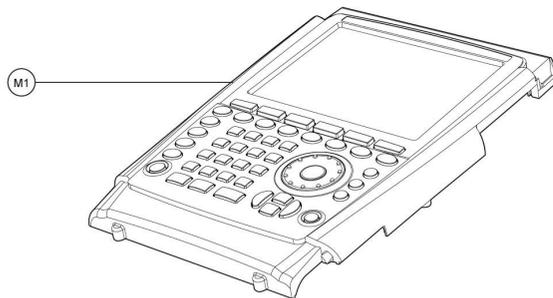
Remove FRONT ROTARY out of the FRONT MODULE
